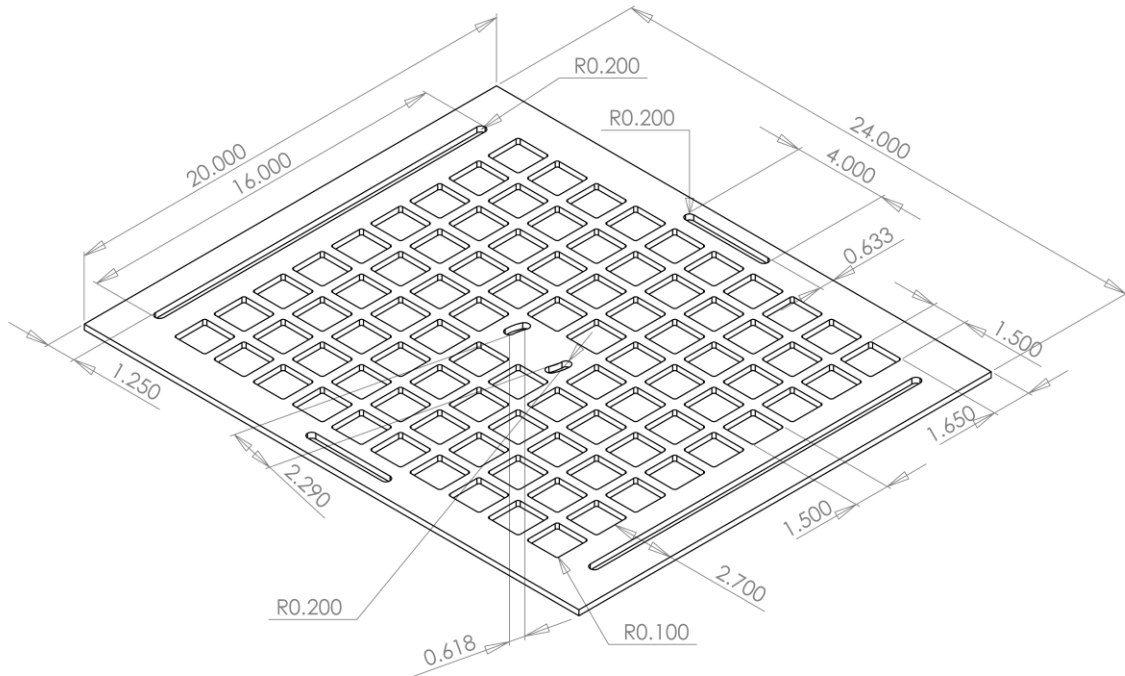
Carburizing Fixture w/ Dimensions in Inches
